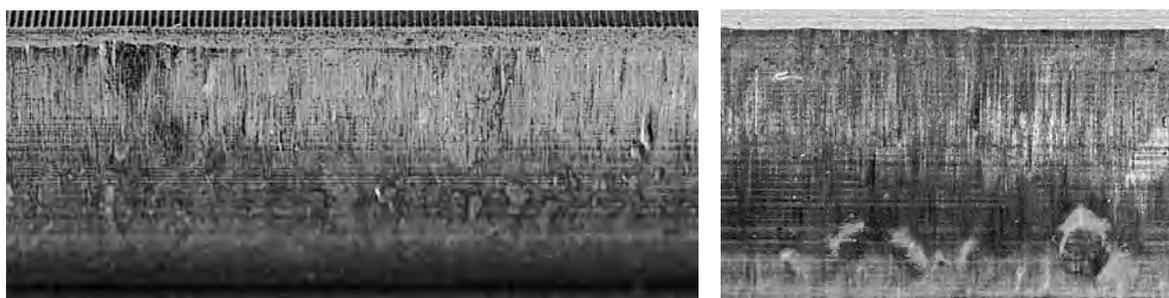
Tooth flank crushing foreign objects (Final drive gears of bulldozer)
